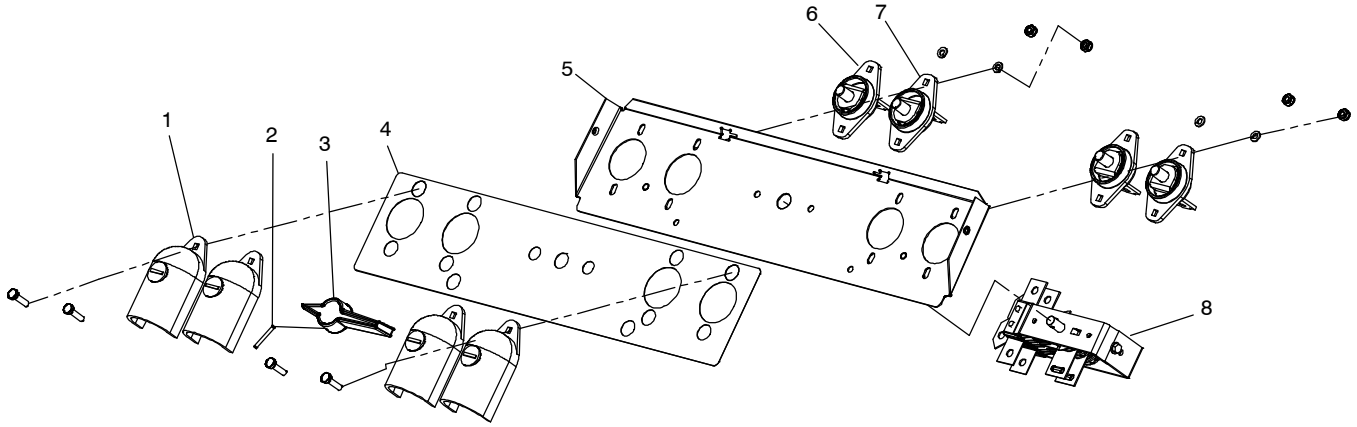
Panel, Front Engine & Weld Controls
